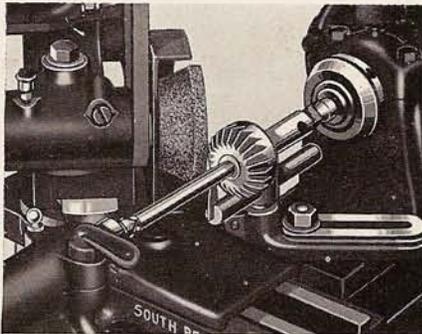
Sharpening a Valve Seat Reamer using Holding Fixture with Spring Stop.
